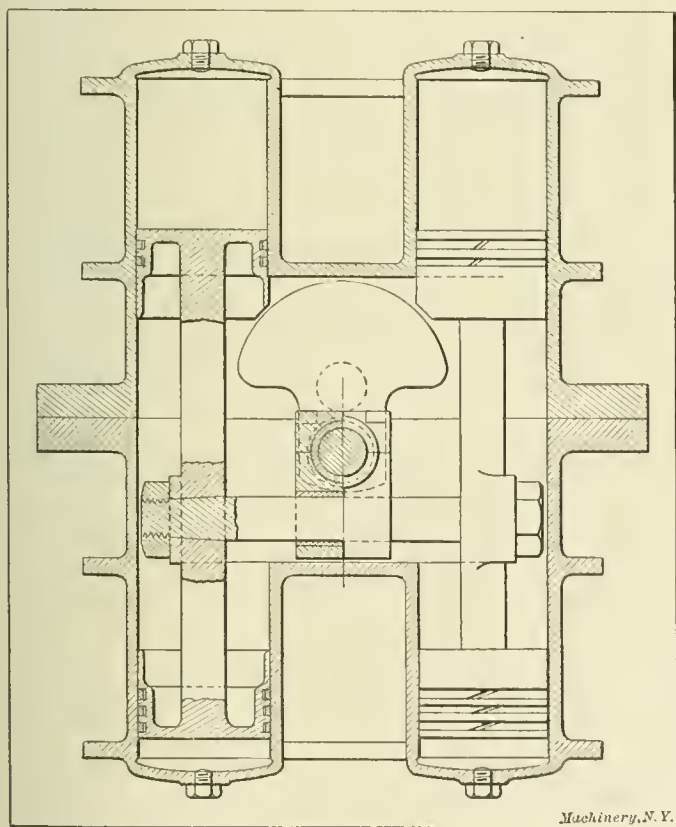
Cross-sectional View of the H Engine showing Piston and Crank Arrangement
